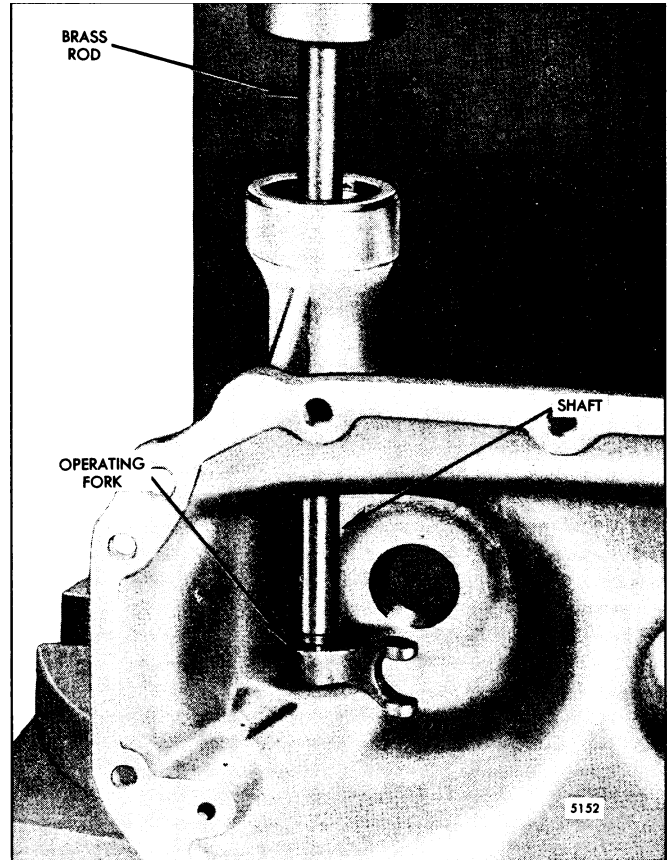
Installing Operating Shaft and Fork in Weight Housing
